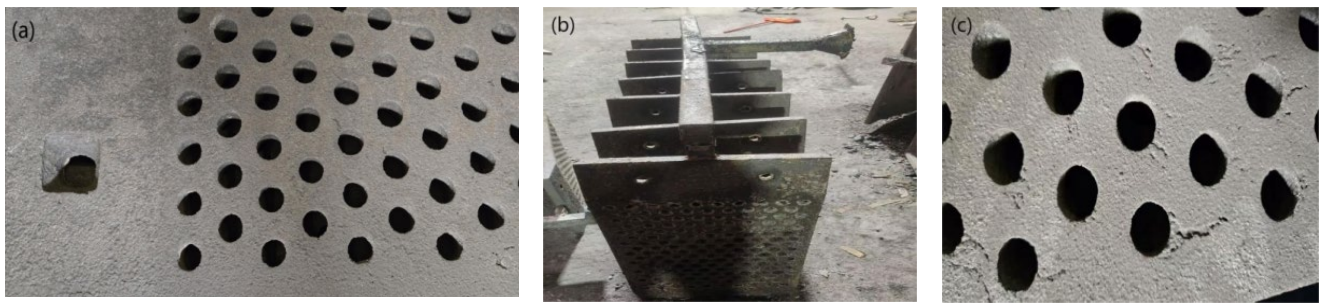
Macroscopic morphology of the actual poured casting: (a) Image of a single liner surface (b) Image of the overall pouring (c) Image of surface defects
